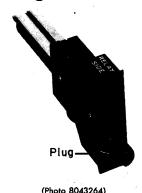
Type XCA11 test probe with shorting plug 0184B5461
